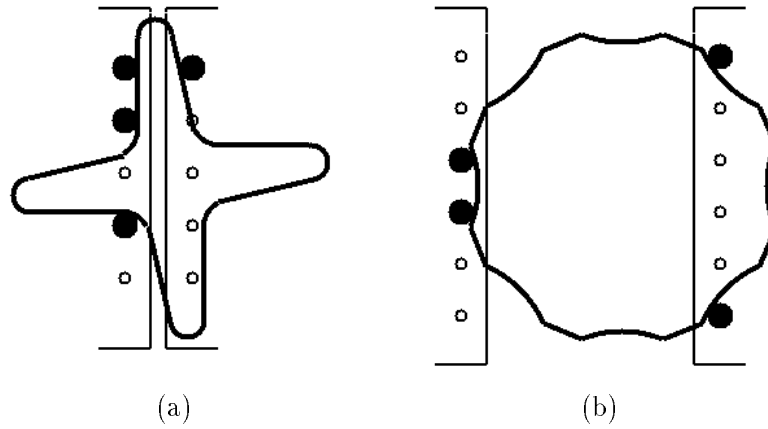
(a) a Type II fixture for thin4Handle (b) a Type I fixture for 8Handle, an eight sided handle
